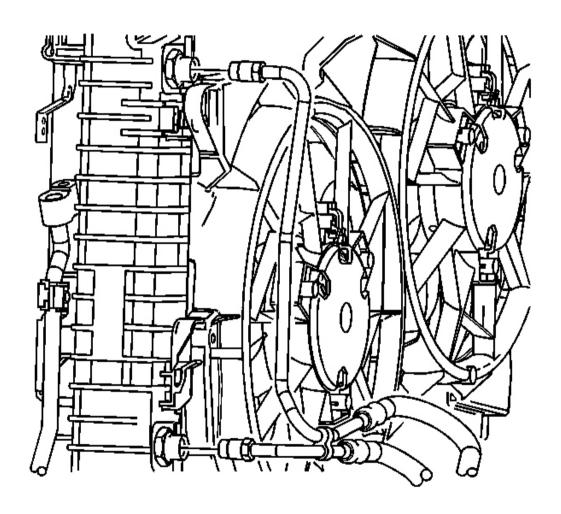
View Of Transmission Cooler Liners To The Radiator Courtesy of GENERAL MOTORS CORP.
